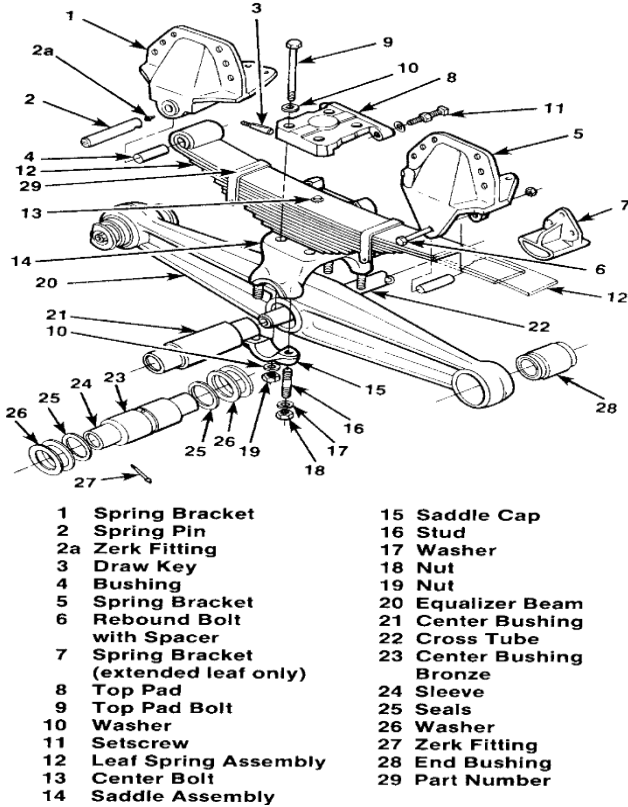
10 Leaf Spring-Type, Equalizer Beam Suspension
